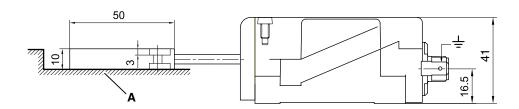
Processor BIS L-409-045-003-07-S4 (dimensions in mm)
